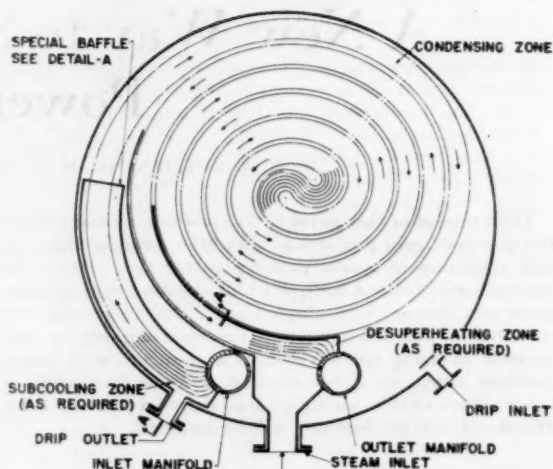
PLAN OF TYPICAL EXTRACTION CLOSED HEATER
